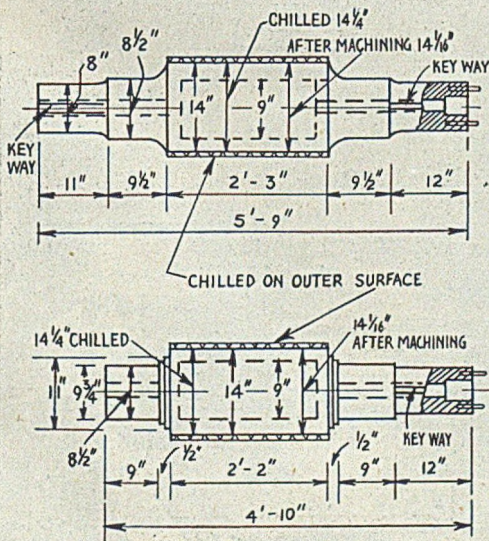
TYPICAL DESIGNS OF HOLLOW CHILLED ROLL CASTINGS.
